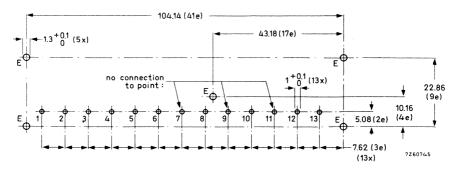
Piercing diagram viewed from solder side of board; e = 2,54 mm (0,1 in).
